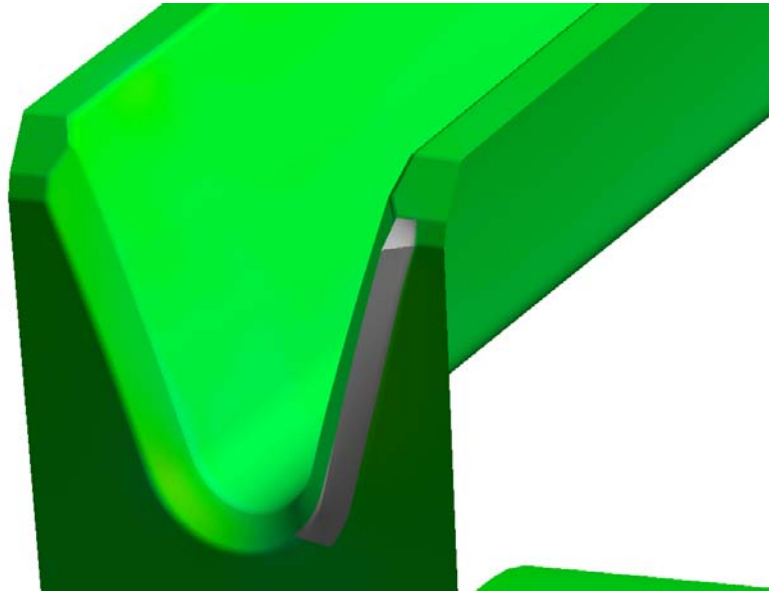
Bell 139-tooth helical gear with leading edge spoiler.
